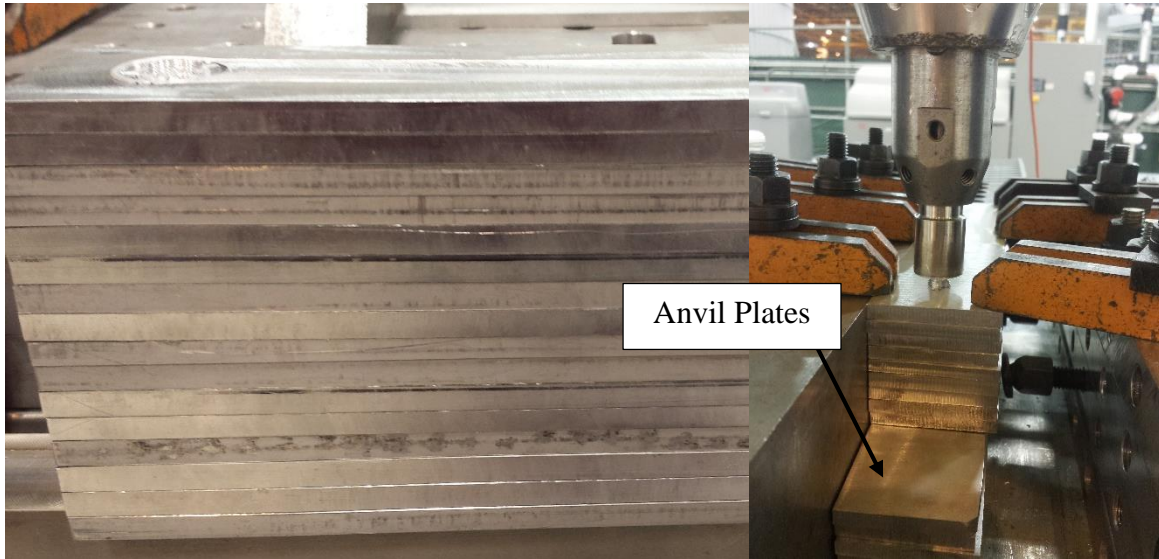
Layer View of Additive Friction Stir Stack (Left), Weld Setup (Right)
